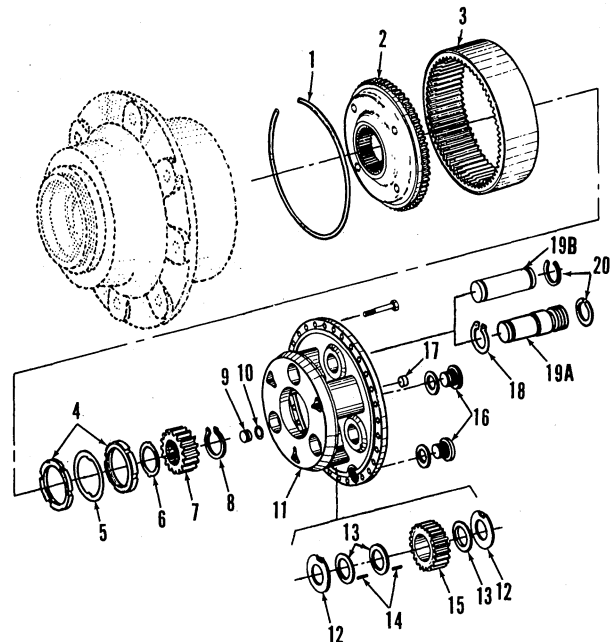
Exploded view of typical planetary drive assembly. Late models use planet pin (19A) with inside snap ring (18), and ring gear (3) and carrier (2) is a one-piece unit.
